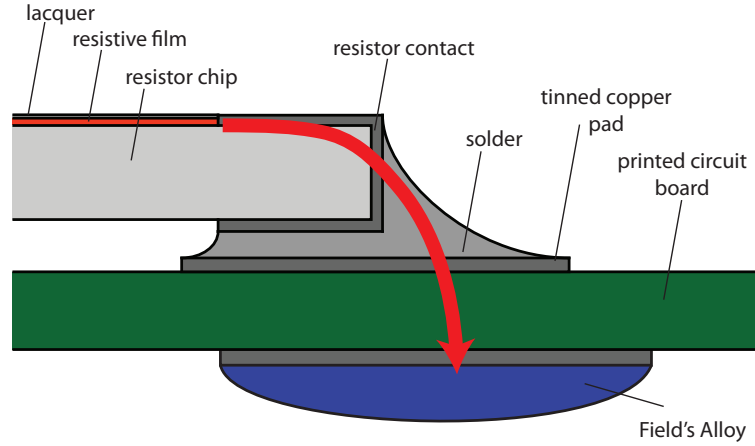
Schematic view of heat transfer through a PCB with a surface mount resistor mounted on one side and a Field's Alloy covered solder pad on the other side.
